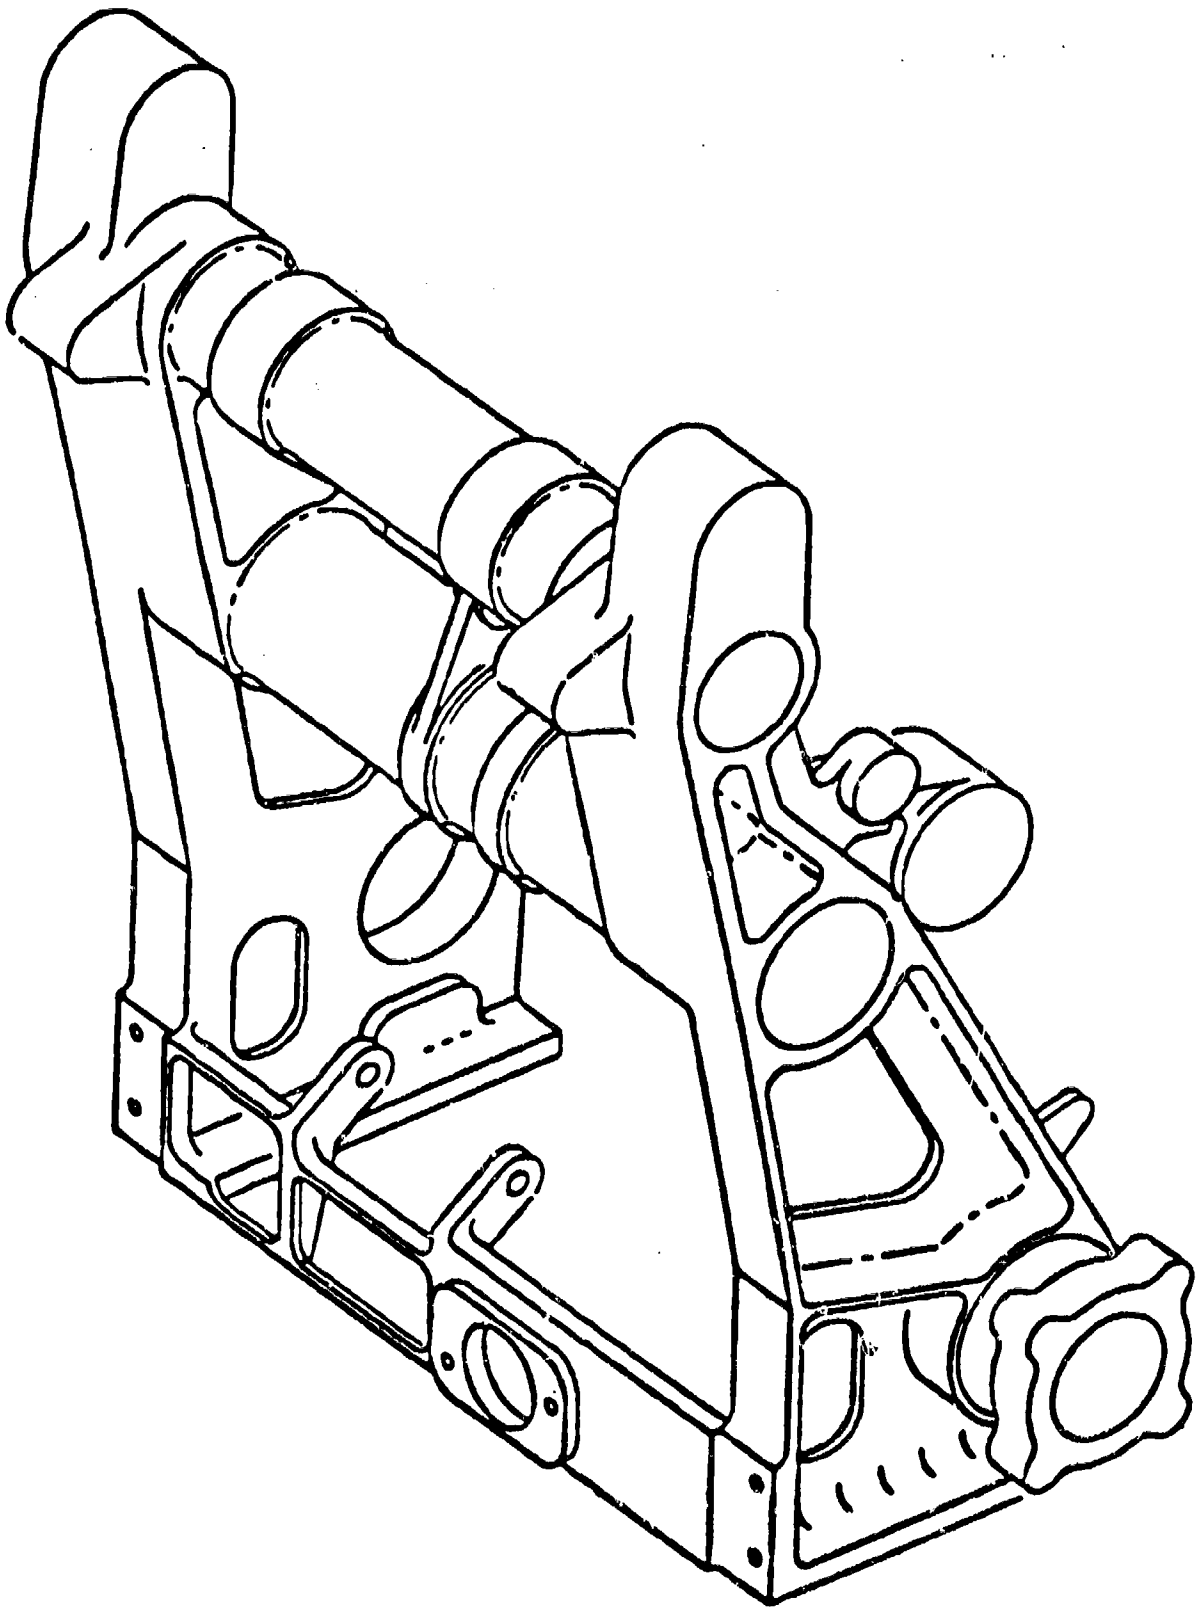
SUPPORT CANOPY MECHANISM, CASTING DESIGN
